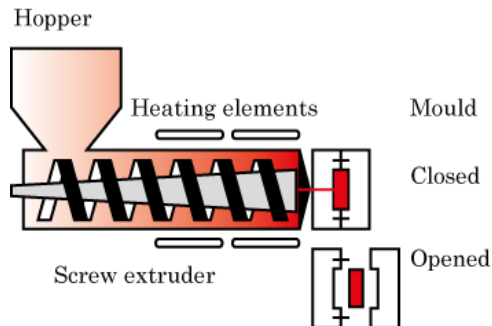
Schematic representation of the injection moulding process. Polymer granulate is added to a hopper and subsequently molten and transported by a reciprocating screw extruder. Once the nozzle is filled the molten thermoplast is injected in the closed mould. After an appropriate cooling time, the mould opens and the desired object is released.
